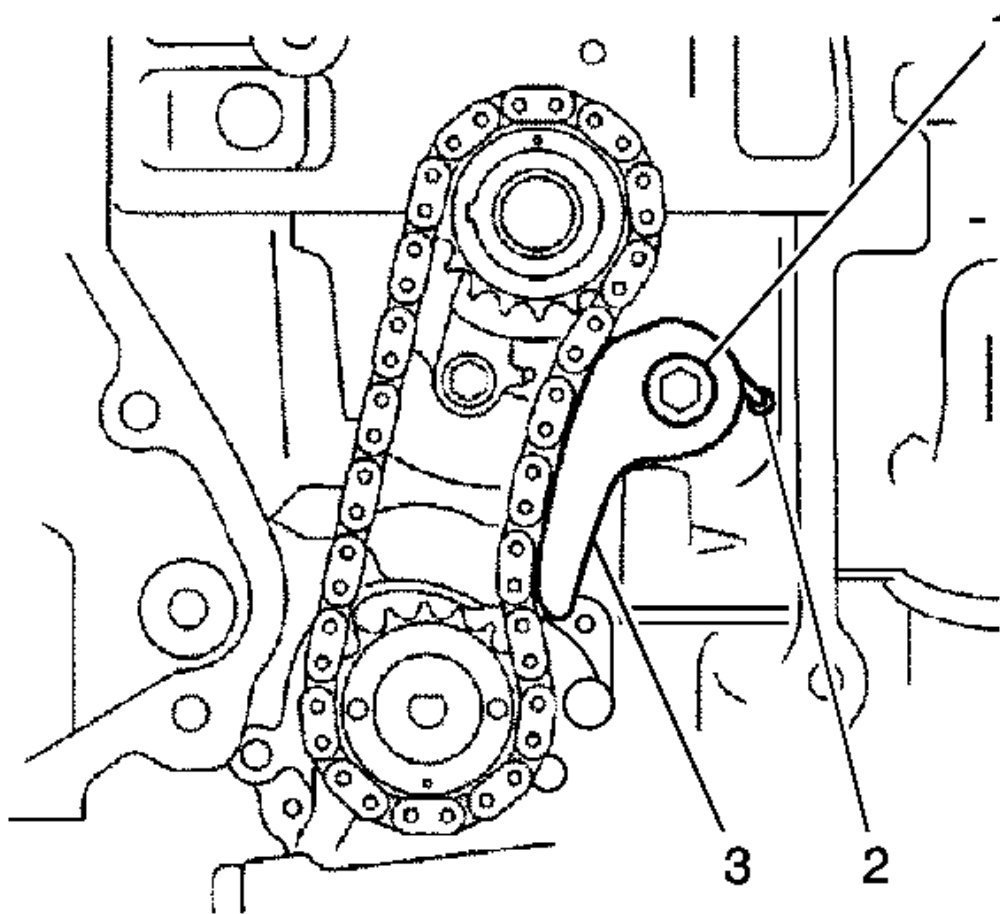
Identifying Chain Tensioner Plate & Bolt
